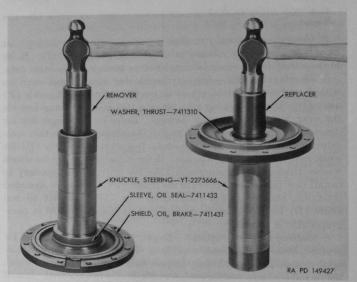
Removing or installing steering knuckle bushing type bearing, using remover 41-R-2369-725 or replacer 41-R-2388-250.
